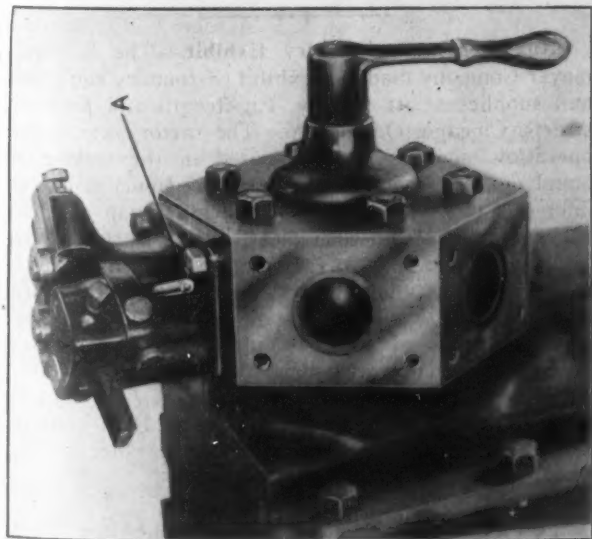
The Tool Clamped in Position on a Lathe Turret.
